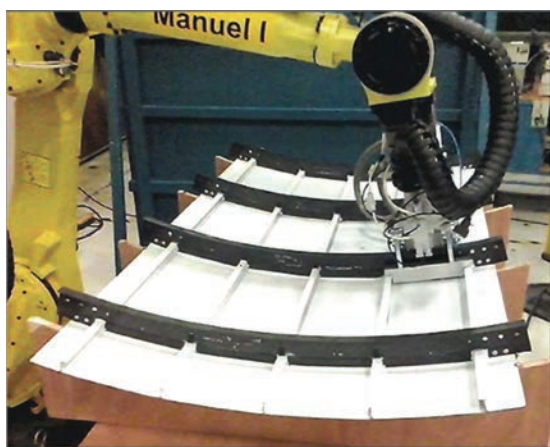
Robotic head for welding elements of fuselage stringers with a heated tool using indirect heating
